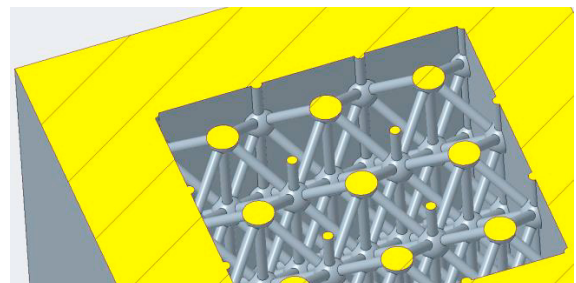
A section of the 3D CAD model showing the internal lattice structure.
